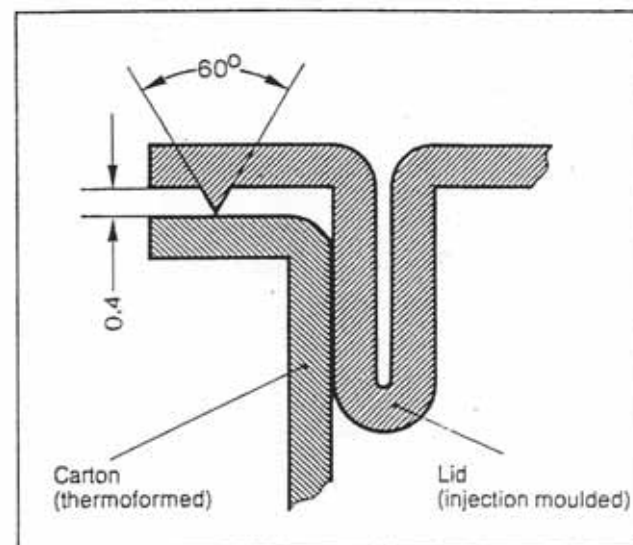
Ultrasonic welding of thermoformed with injection moulded parts.
